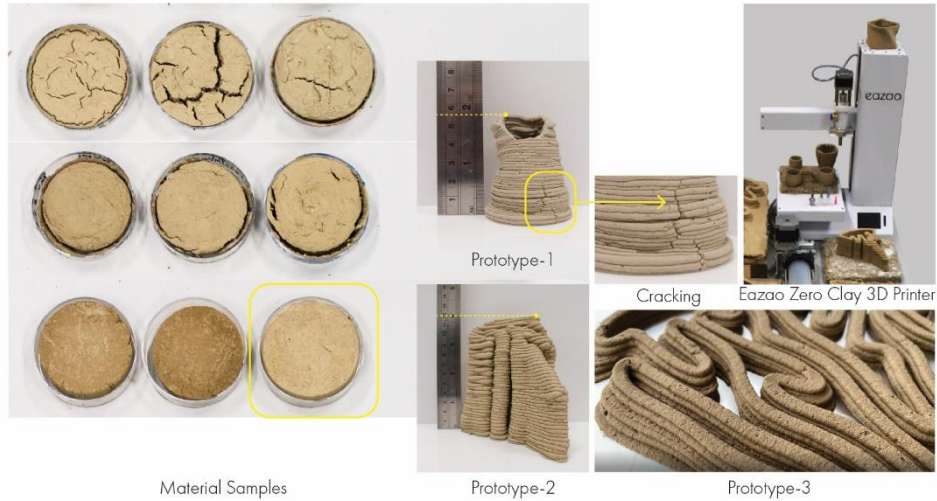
Modified material samples of Cal-x (left); Prototypes of printed Cal-x (right).
